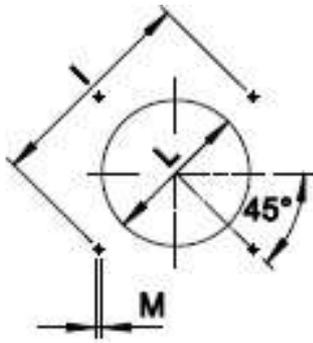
Dimensions FNDP 190/M-EL - FNDP 250/M-EL
